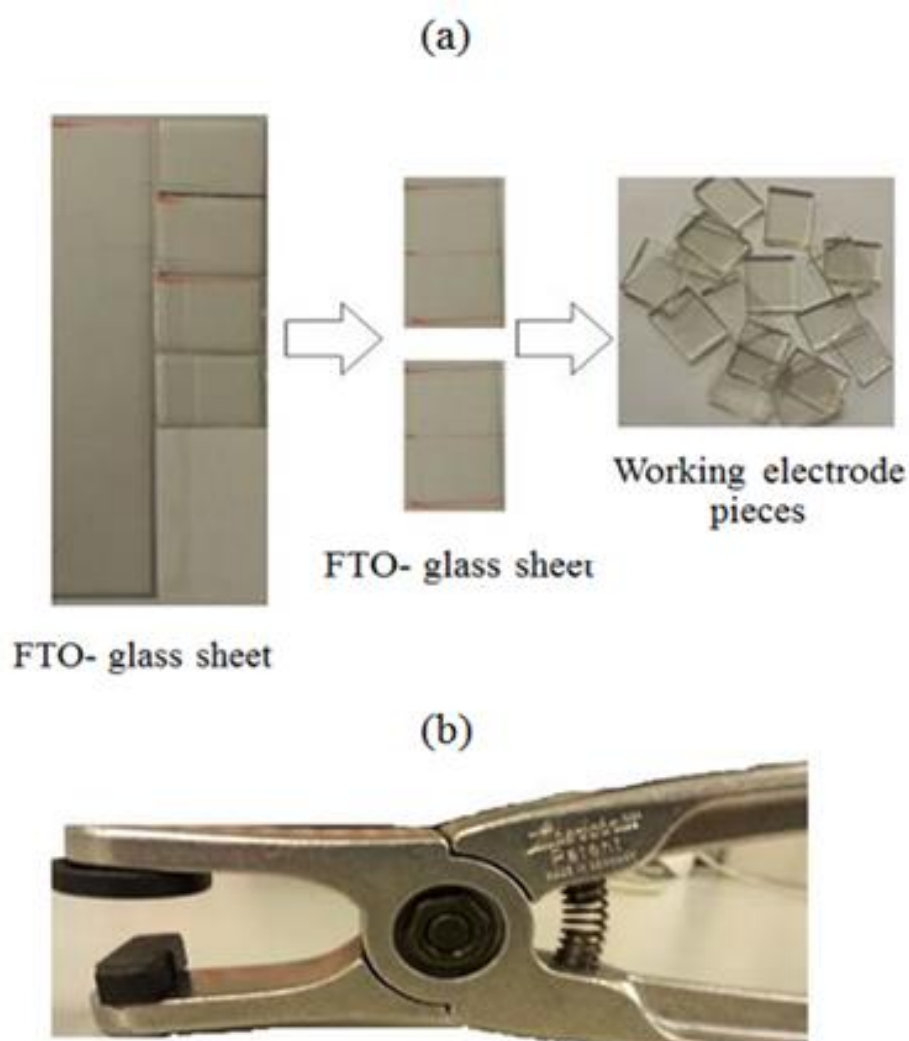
The cutting of FTO-glass: (a) process of cutting FTO-glass; (b) a photograph for the breaking pliers
